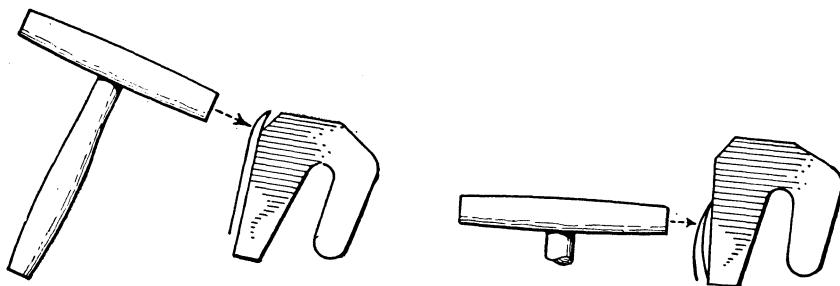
Putting the set in crosscut-saw cutting teeth. At right, correcting a tooth bent too far.
